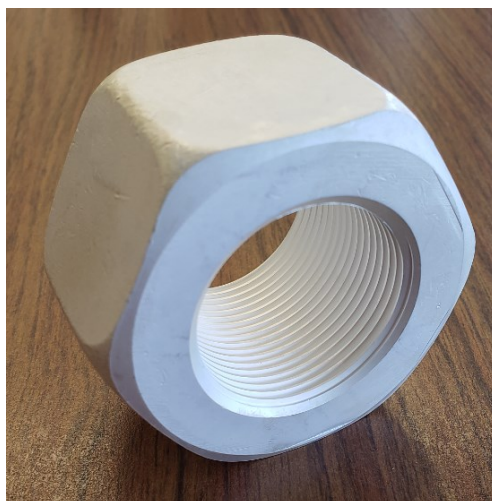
Significant galling was seen when pairing 304 stainless steel nuts with 304 stainless steel bolts to mount the THETA flange to the METL vessel, even with the use of nuclear grade high temperature anti-seize. 1-1/2”-12 heavy hex nuts in Inconel 718, SB-637 with silver coating were acquired to mate with the stainless steel flange bolts
